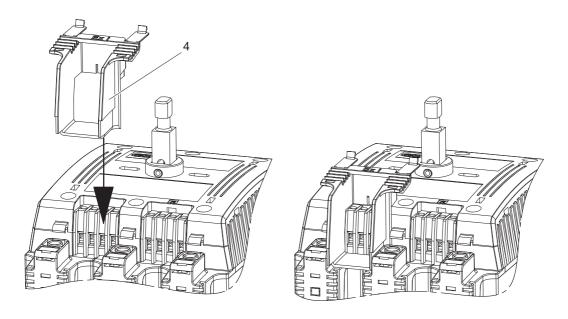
Mounting the cover for Ex i auxiliary contact
